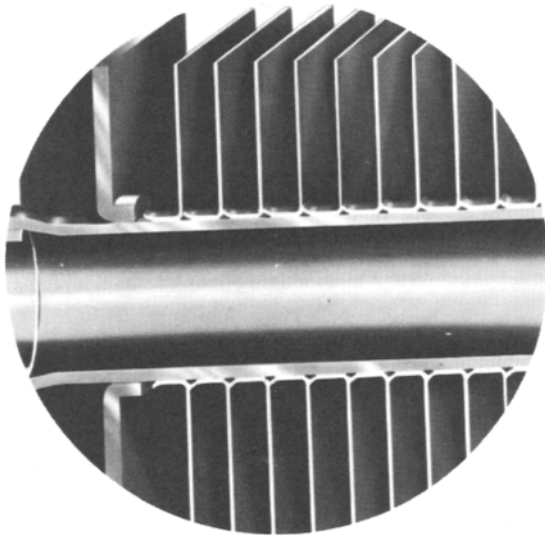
E. A cutaway section of plate-type fins showing the continuous surface contact of the mechanically bonded tube and fins. (Used by permission: The Trane® Co., La Crosse, Wis.)
